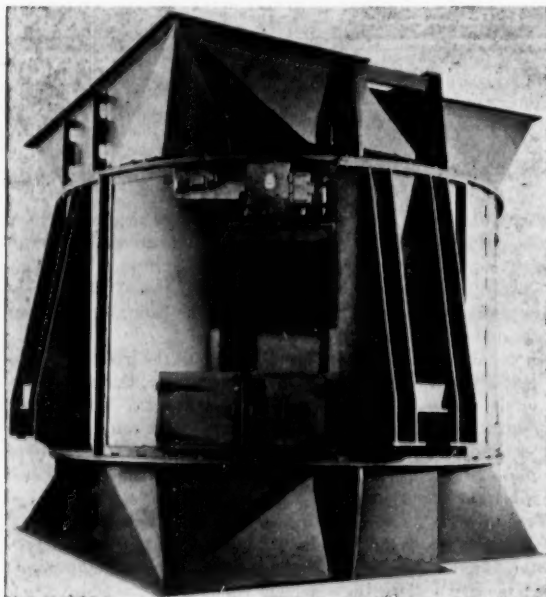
SHOP ASSEMBLY OF TYPICAL INVERTED HEATER OF MEDIUM SIZE—SIDE VIEW
